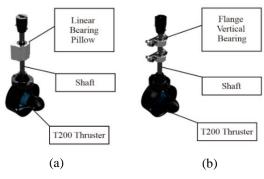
CAD Design Thruster Assembly a) Mandakini Catra; b) Mandakini Hydra.
